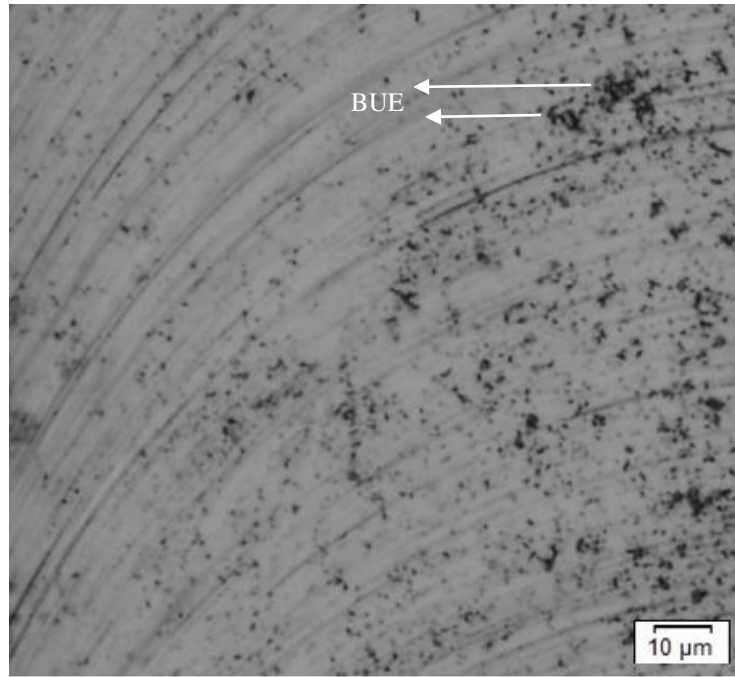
Machined surface of 316L stainless steel with uncoated WC tool, $\Phi 0.406$ mm, 2 flute, 10 m/min speed, 0.05 $\mu\text{m}/\text{tooth}$ chip load, 30 μm depth, MQL.
